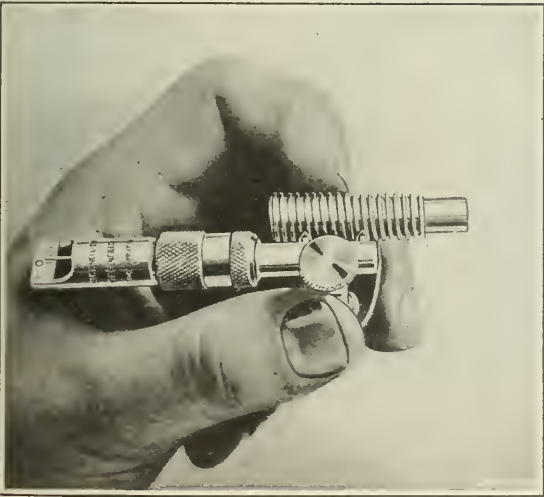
Thread Lead Indicator in Use testing an External Thread
